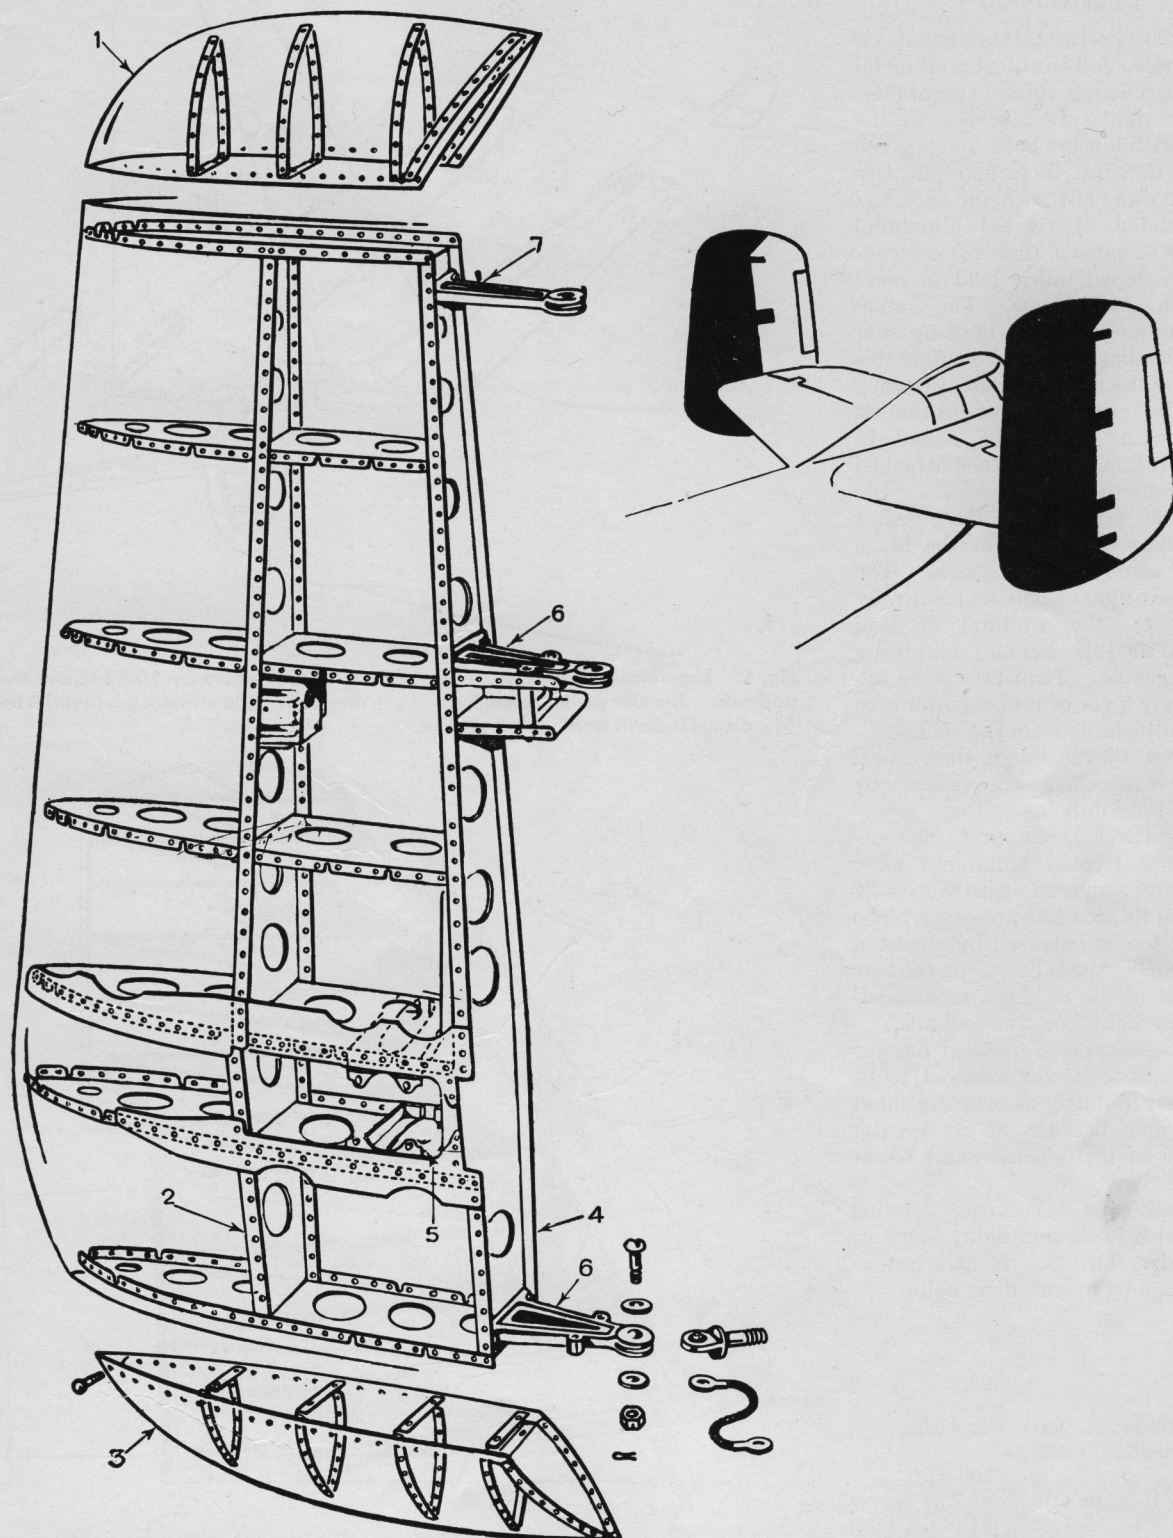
Structural details of the vertical stabilizer: (1) tip assembly; (2) front spar; (3) lower tip assembly; (4) rear spar; (5) rudder control sheave support; (6) (7) rudder hinge brackets.
